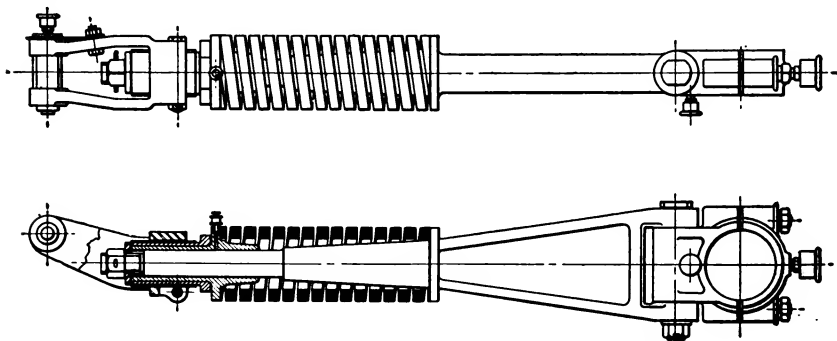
Flexible Universally Jointed Radius Rod for Double Side-Chain Drive
